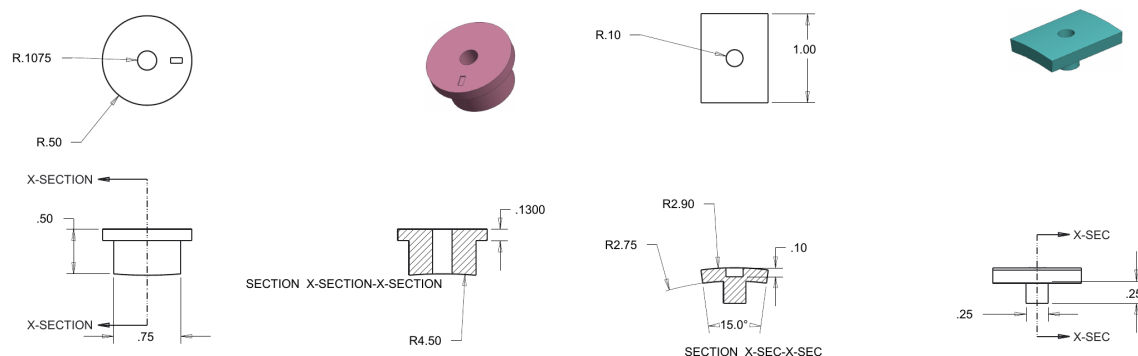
Schematic drawings of the non-conductive end caps for holding the circular cylinders in the circular test section.
